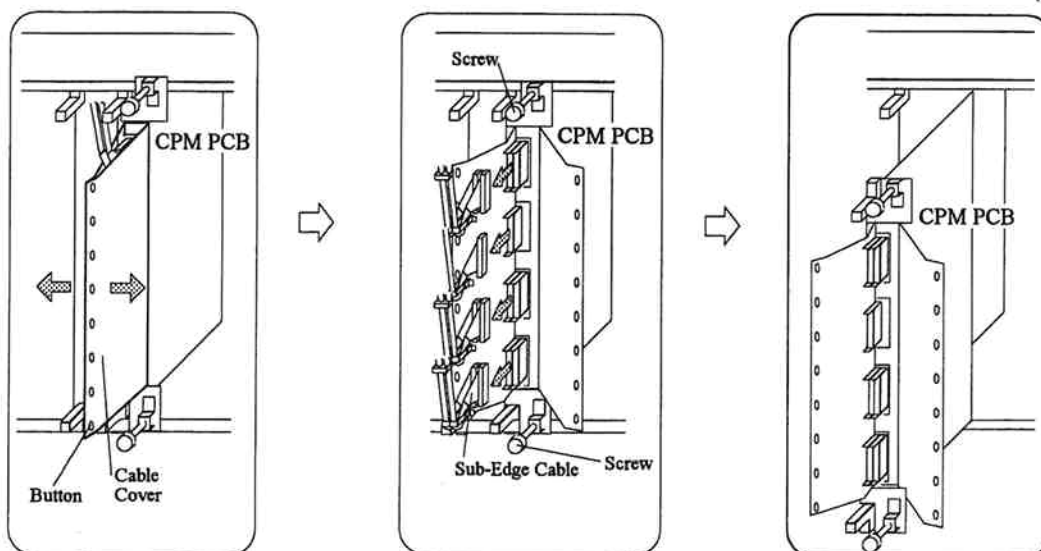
Removal of the CPM PCB
